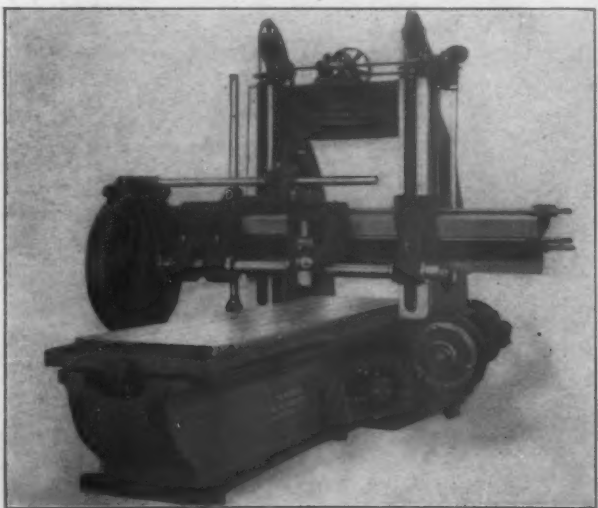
Ingersoll Horizontal Spindle Slab Milling Machine, with Special Vertical Spindle Attachment for Key Seating.
